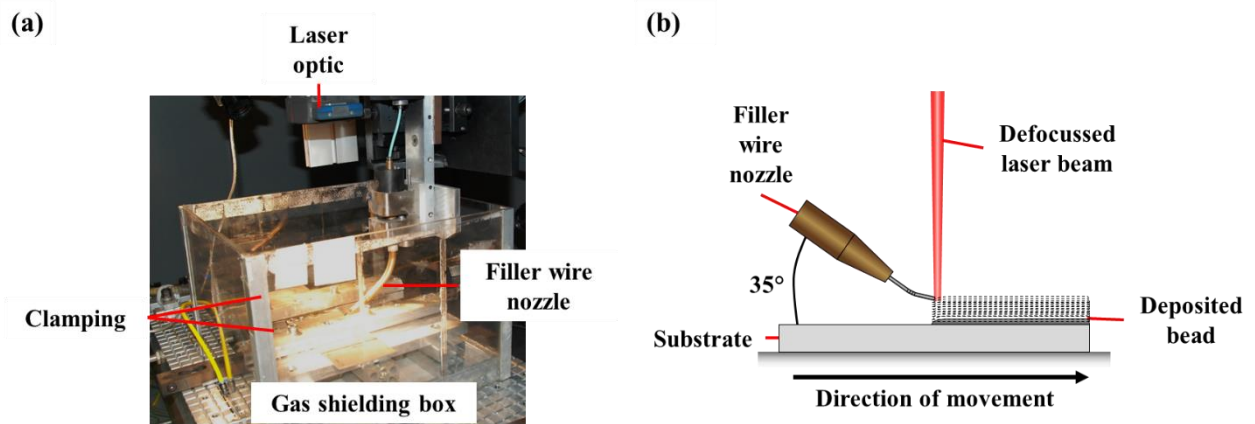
Experimental setup for LMwD depositions. (a) Side view. (b) Schematic filler wire nozzle positioning.
